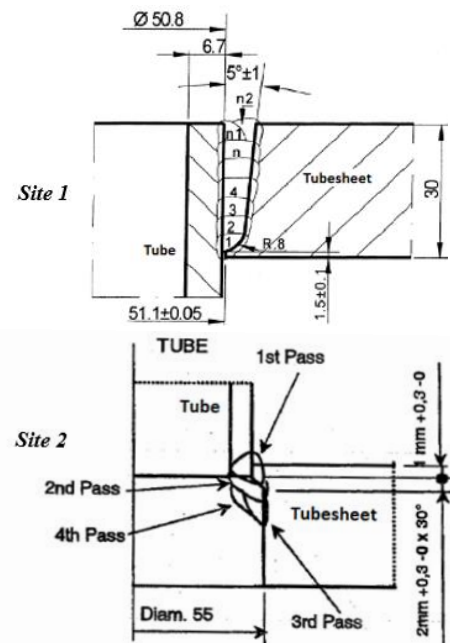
Geometry of tube-to-tubesheet welding in site 1 and 2
